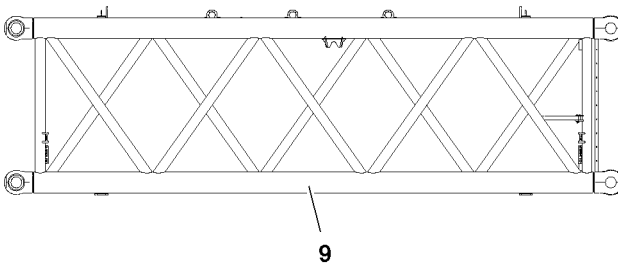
S-/LI-intermediate section 6 m or 12 m
